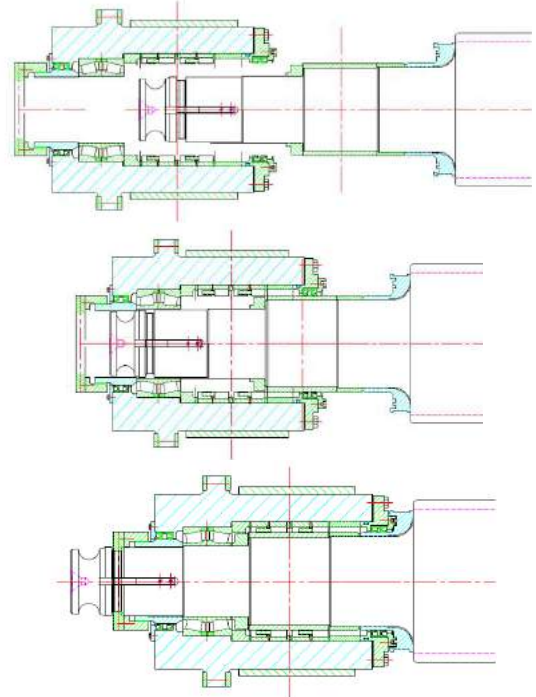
Mounting of the CRB to the roll (Original type bearing) [1]
